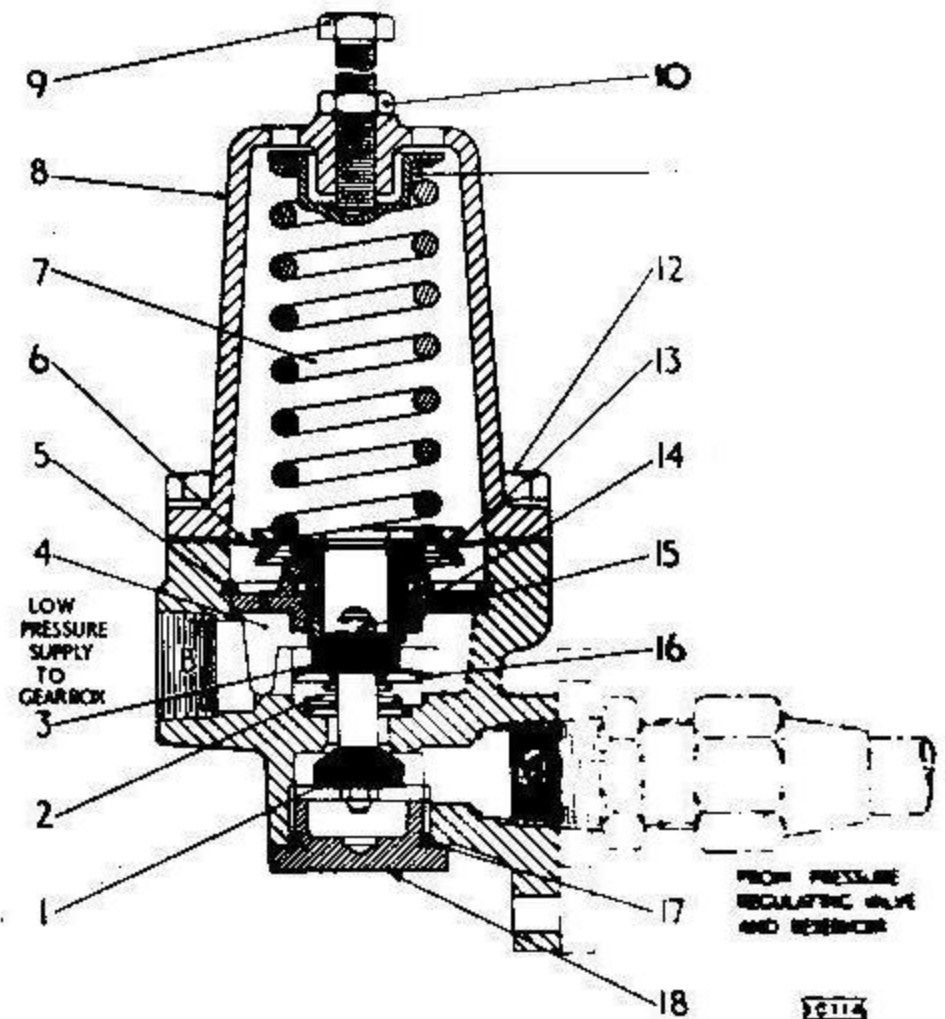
Sectioned view of the Clayton-Dewandre reducer (limiting) valve
